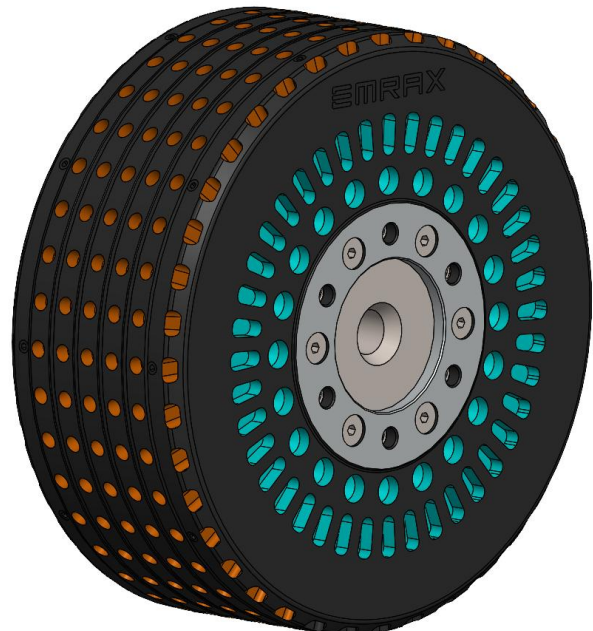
AC/CC motor front side, air cooling inlets (blue) and outlets (orange)
